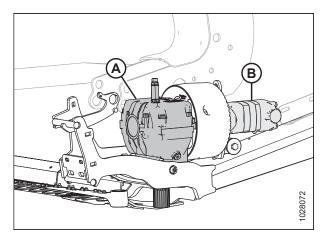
Left Knife Drive Box Shown – Right Similar
